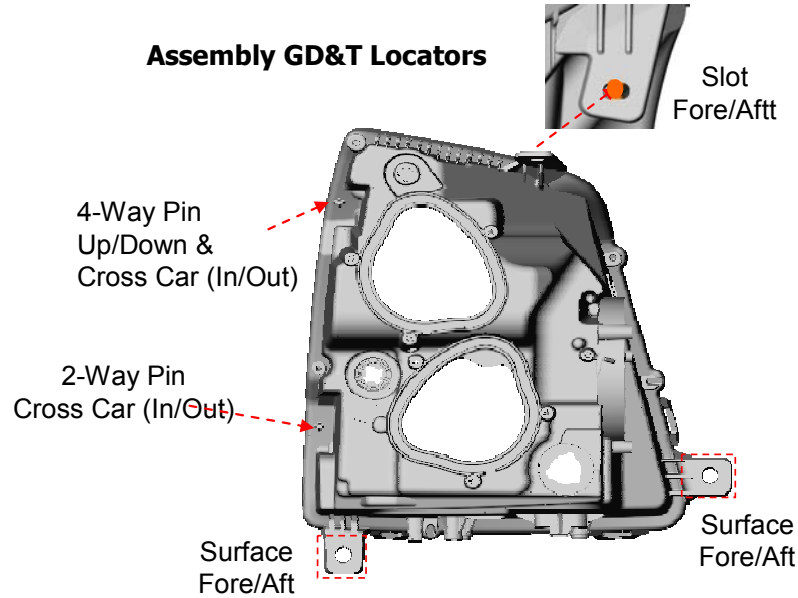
Headlamp Assembly GD&T and Vehicle Alignment Features
